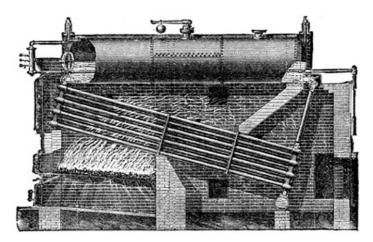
Babcock and Wilcox's Sectional Boiler.
